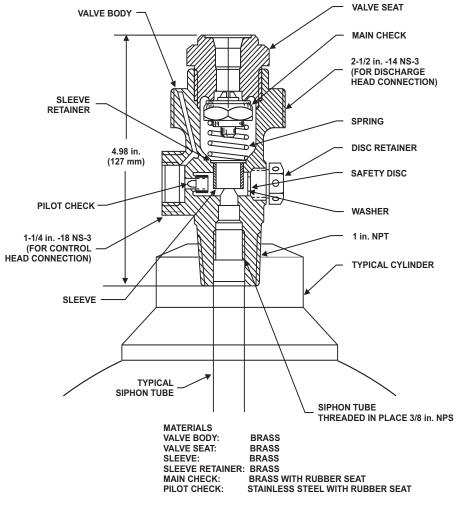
I/2-inch Type "I" Cylinder Valve
